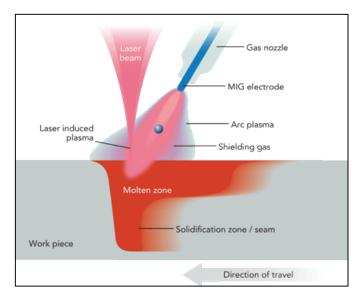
Laser hybrid welding configuration. Source: www.industrial-lasers.com.
